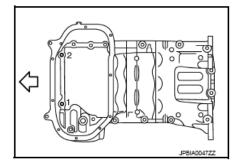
Identifying Oil Pan (Upper) Mounting Bolts With Tightening Sequence Courtesy of NISSAN NORTH AMERICA, INC.
